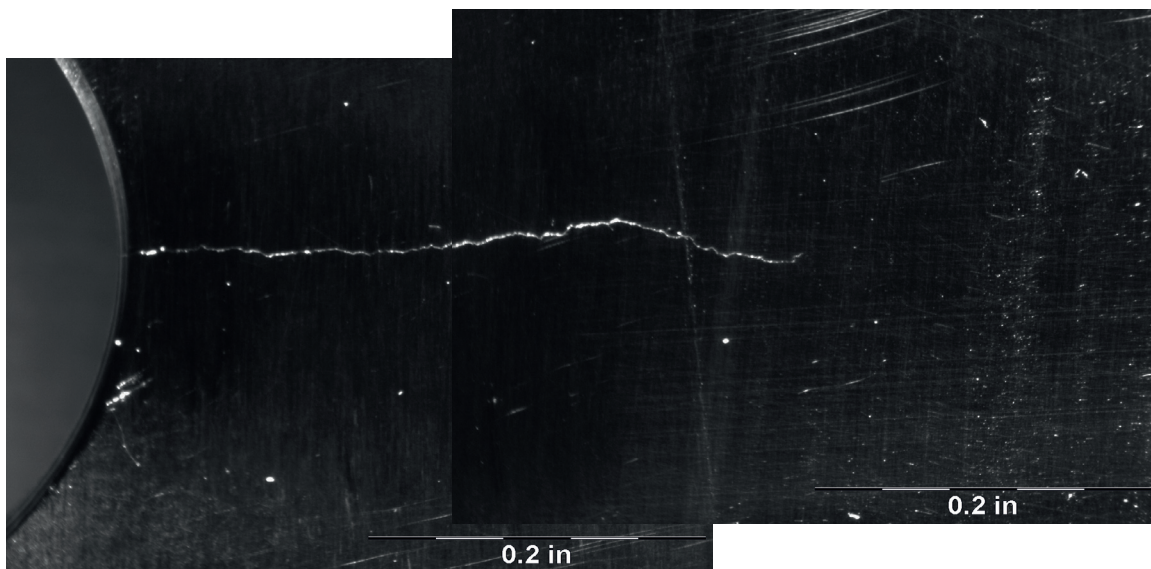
Image of Surface Crack in Coupon Cx4N1-08-B, Surface Crack Length is 0.4974 inch.
